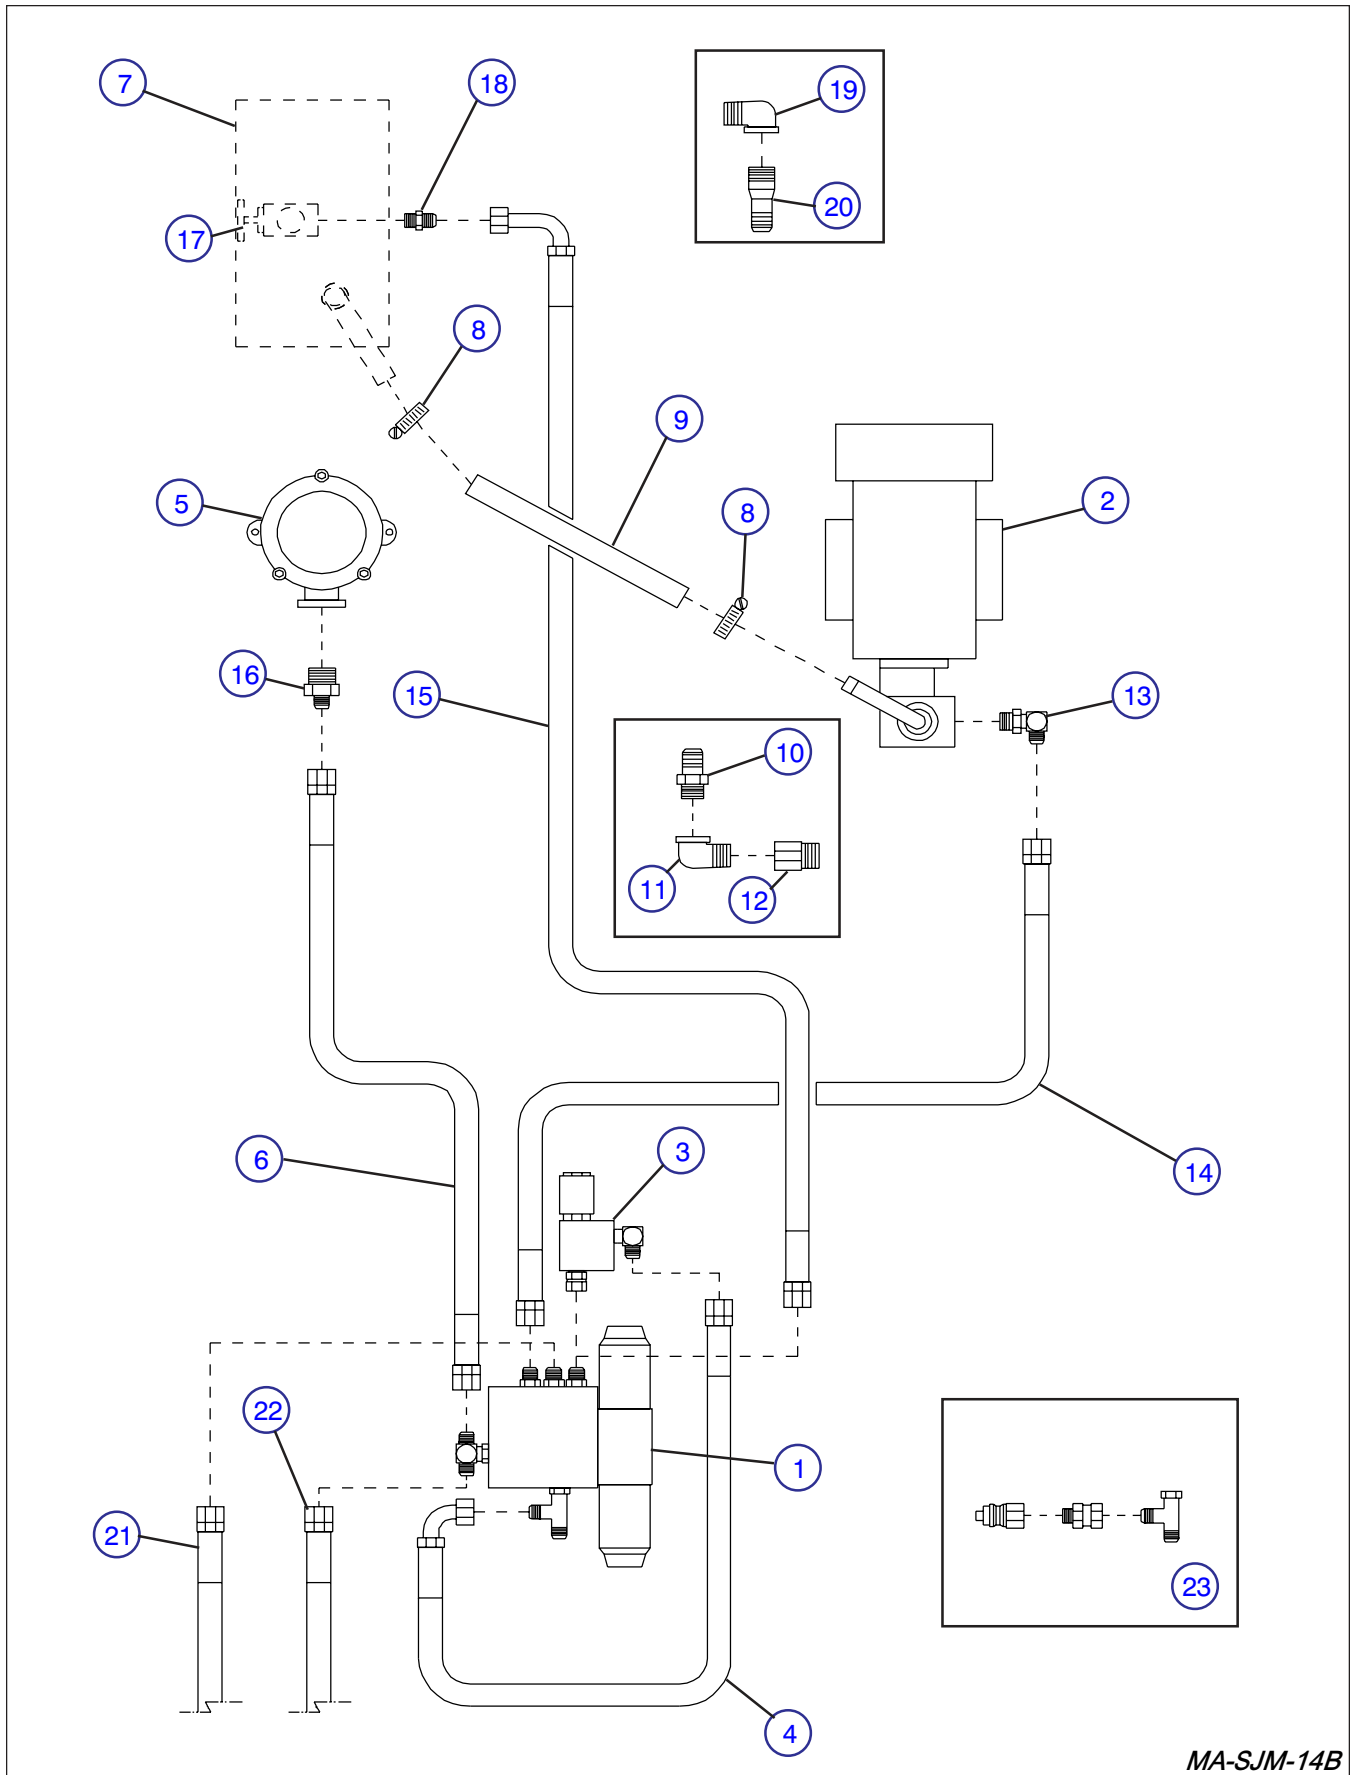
HYDRAULIC HOSE CONNECTIONS - Hydraulic/Electric Tray
